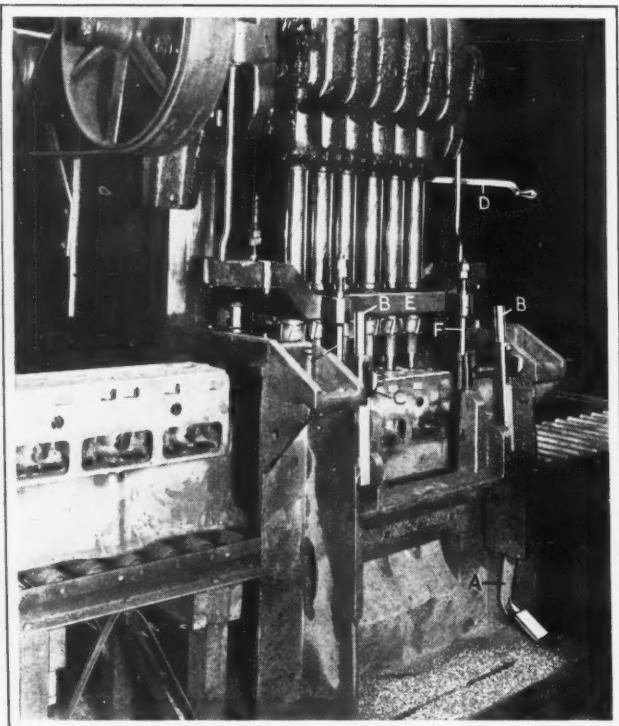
Type of Equipment Employed for Rough- and Finish-boring the Six Cylinder Bores
